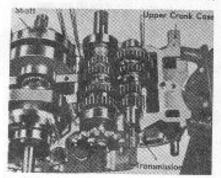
View of crankshaft and transmission gears assembled in upper crankcase.
